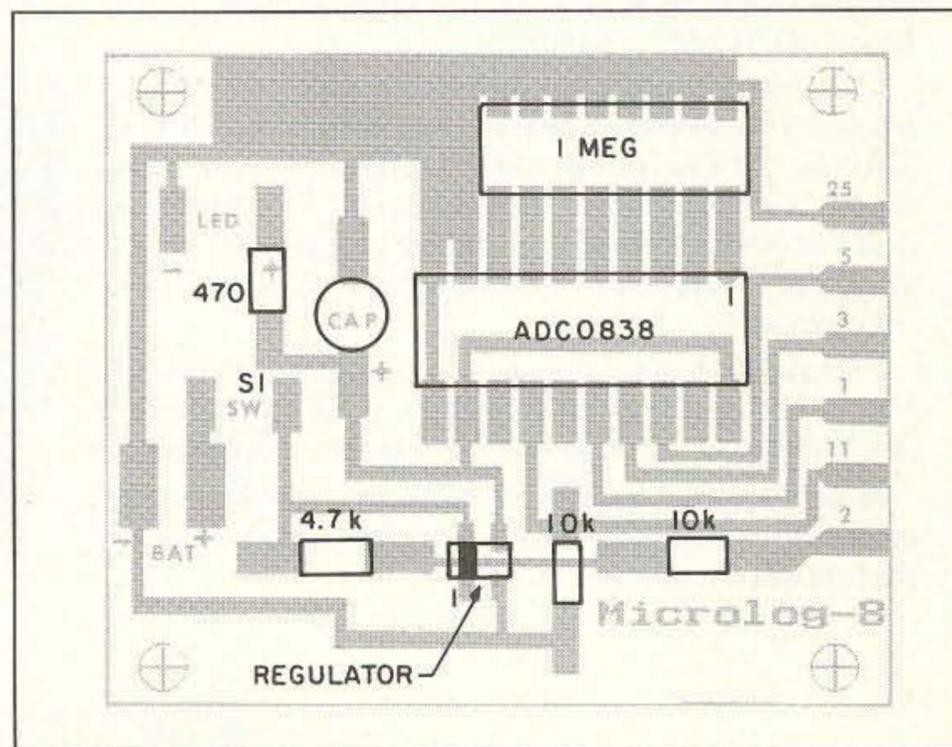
Parts placement. Note that all components mount on the foil side of the PC board.
